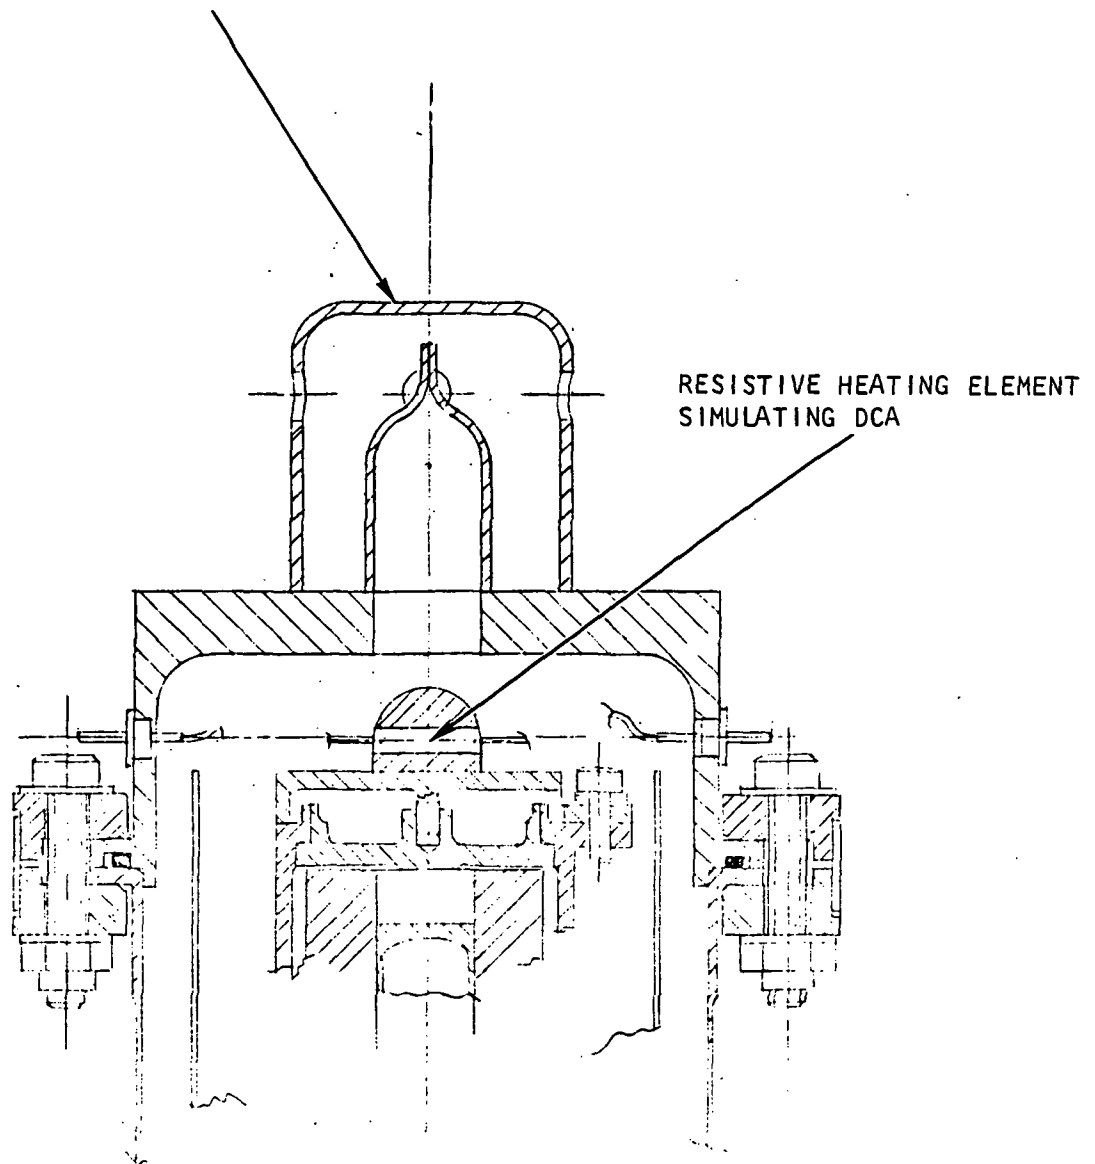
Cold End Vacuum Dewar Test and Shipping Closure
